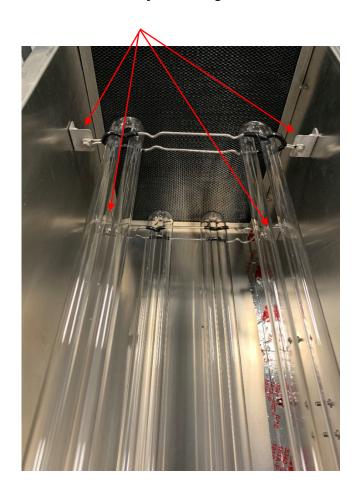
Remove 1/4" Screws Holding Bulb Support Wires
